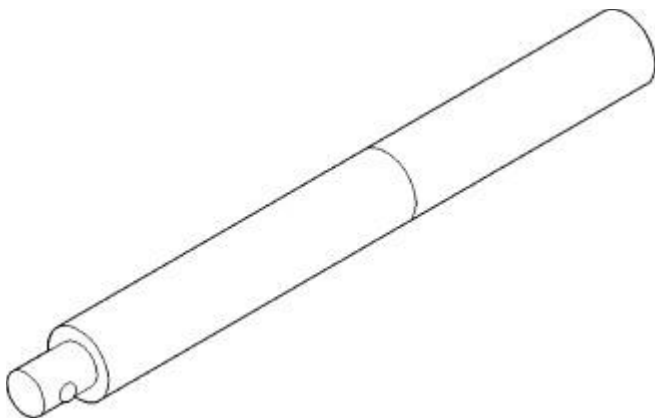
DRIVER HANDLE, UNIVERSAL - C-4171
